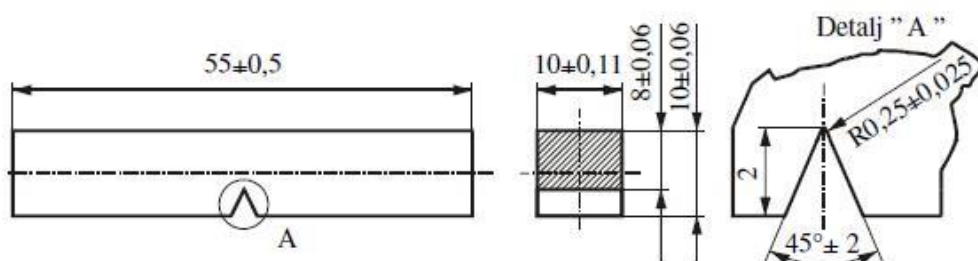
Shape and dimensions of a standard Charpy impact test specimens
